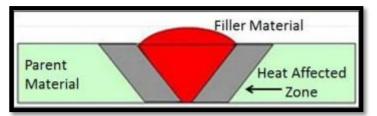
Zones of a TIG weld showing parent material, HAZ, and filler material
